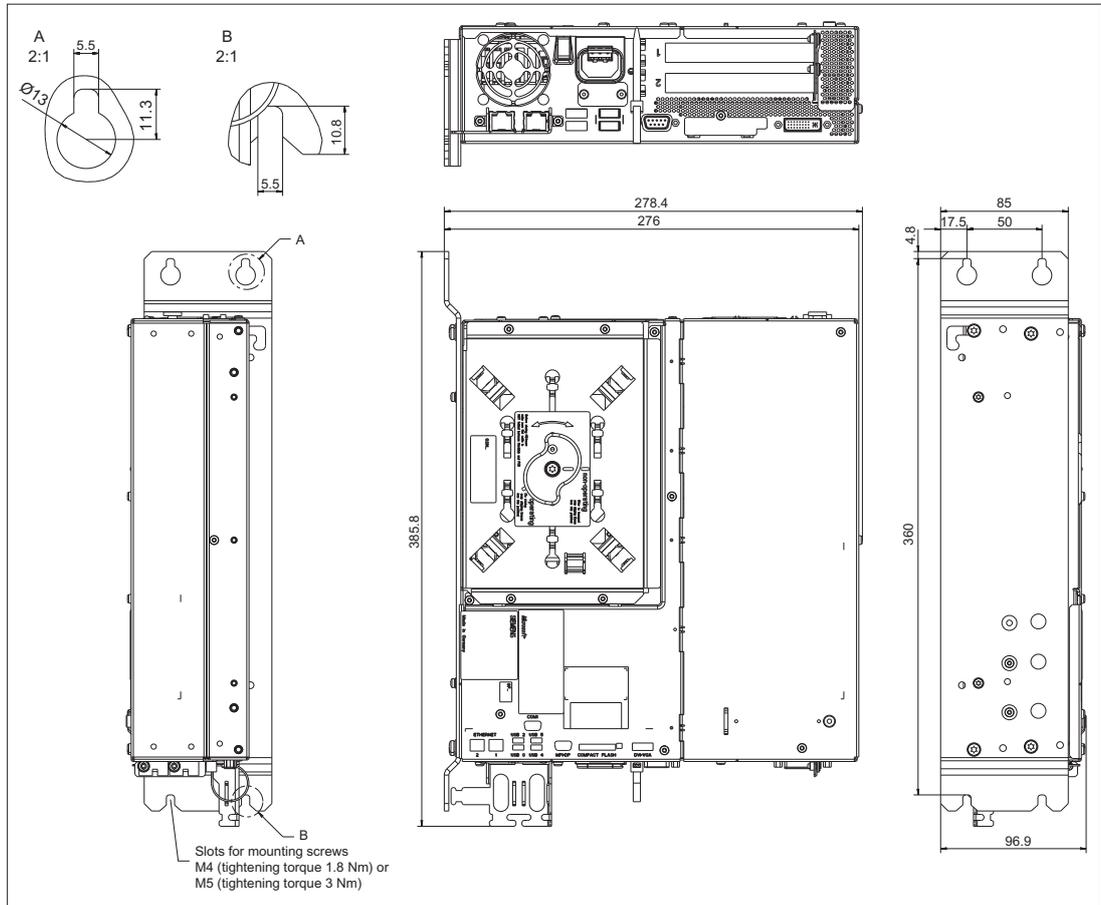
Dimension drawing, PCU 50.3 book mounting
